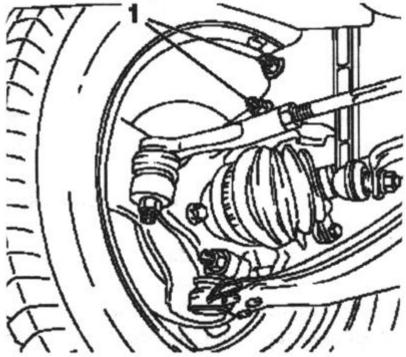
Bolts supporting pipe spring stands at a turning fist:
